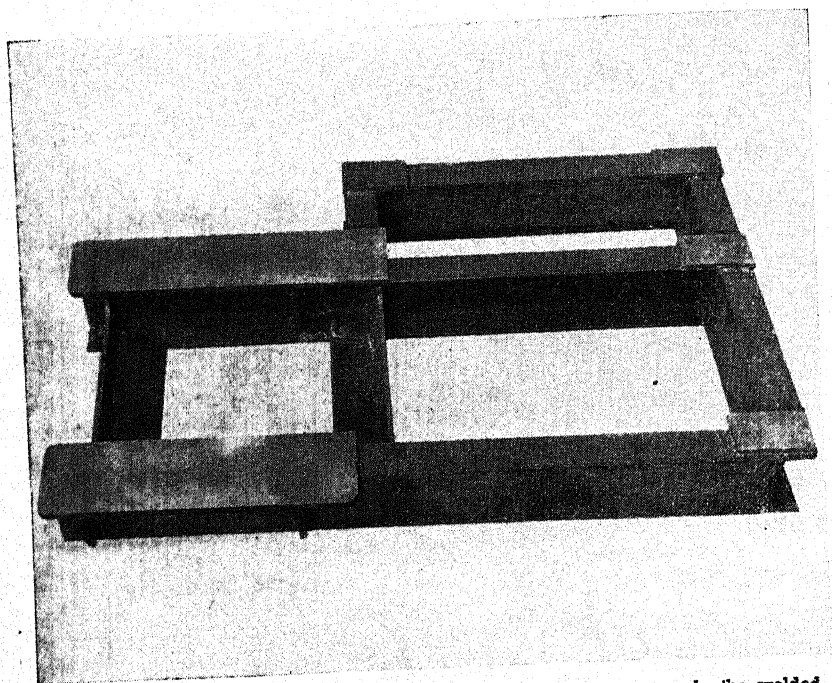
Arc welded bed plate which is fabricated at great economy in the welded welding fixture.
